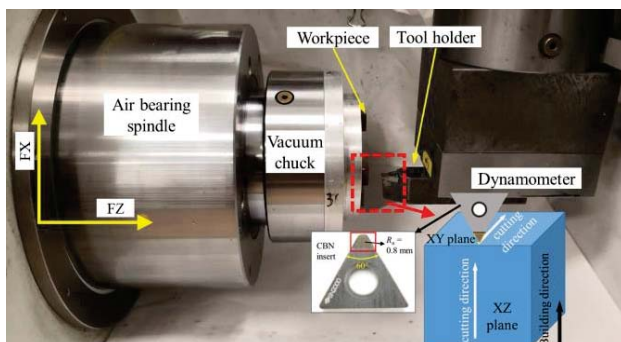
Setup for ultra-precision machining LPBFed Inconel 718 alloy.
